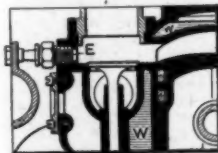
Section of a motor cylinder showing the spark plug placed horizontally in the valve chamber
